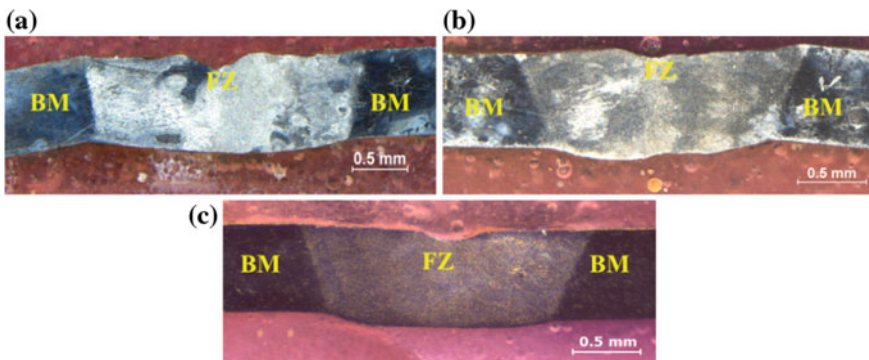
Obtained weld bead from a as-received, b ST1 and c ST2 condition base material
